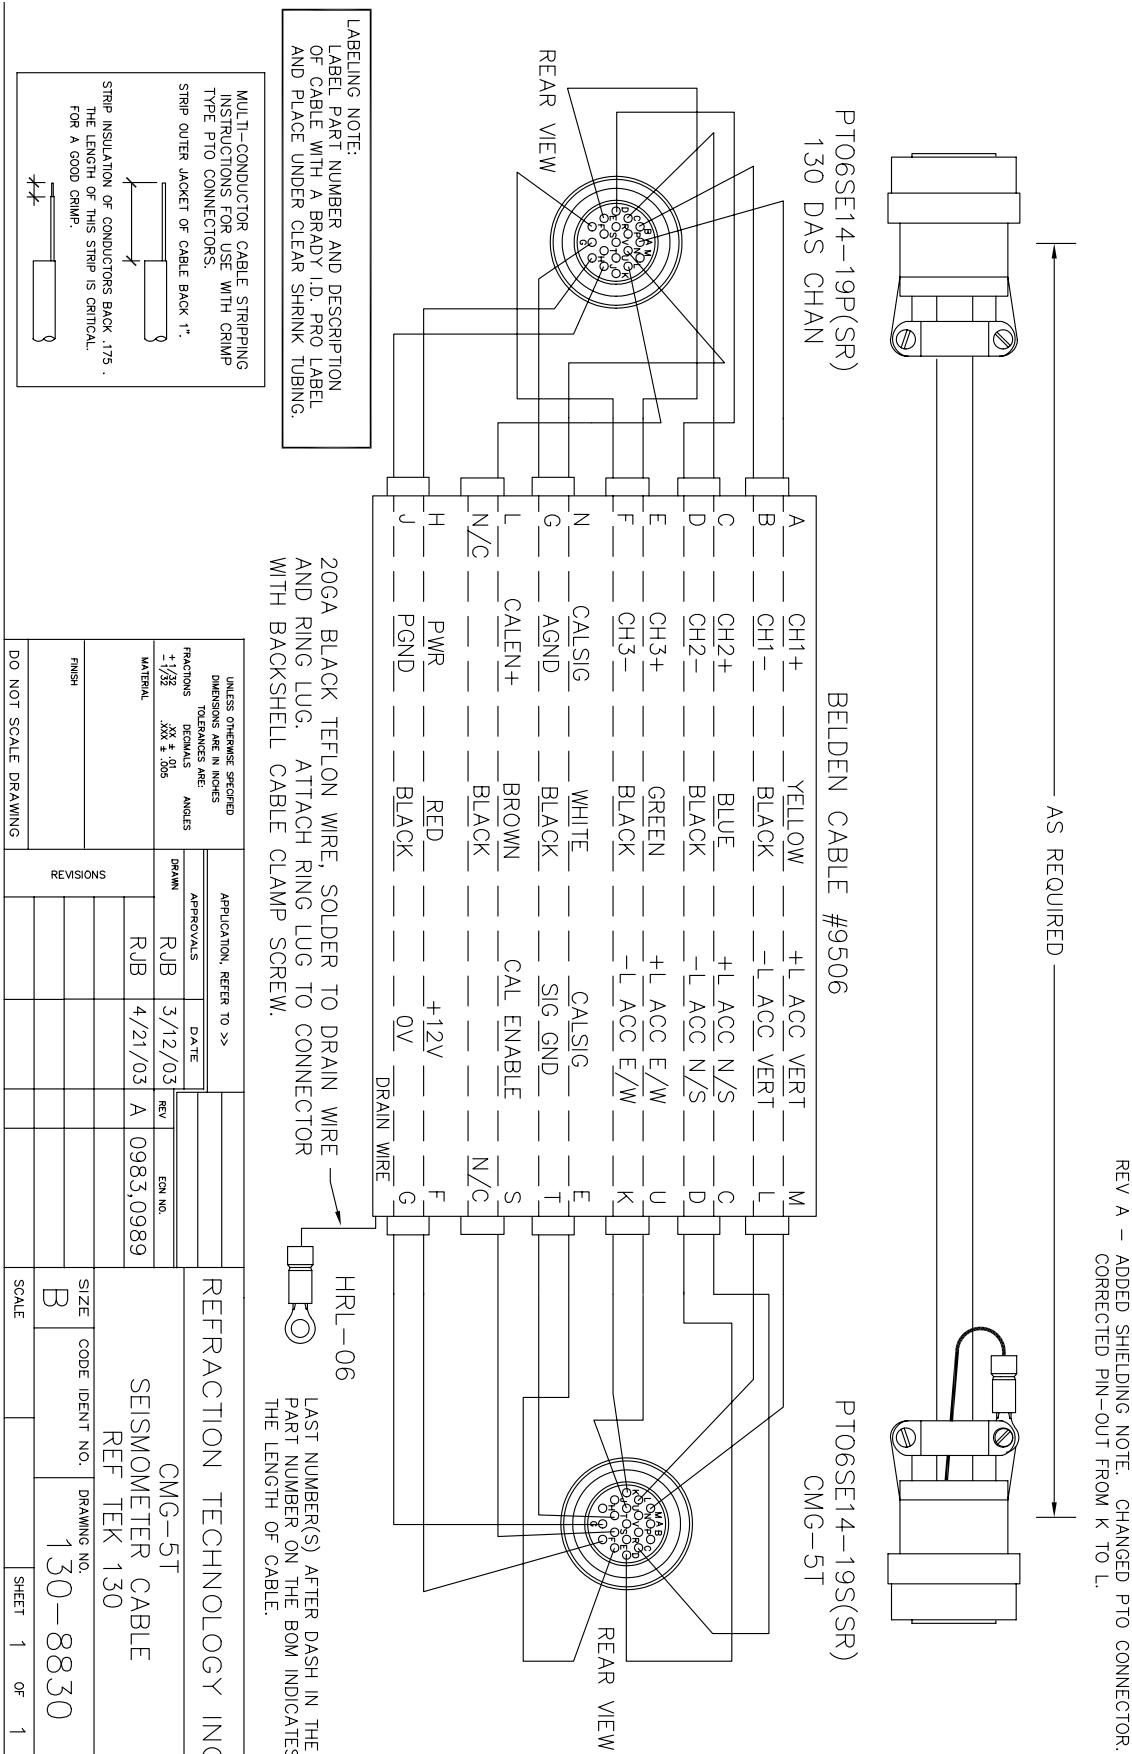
26 130-8830 - CMG-5T Seismometer Cable
